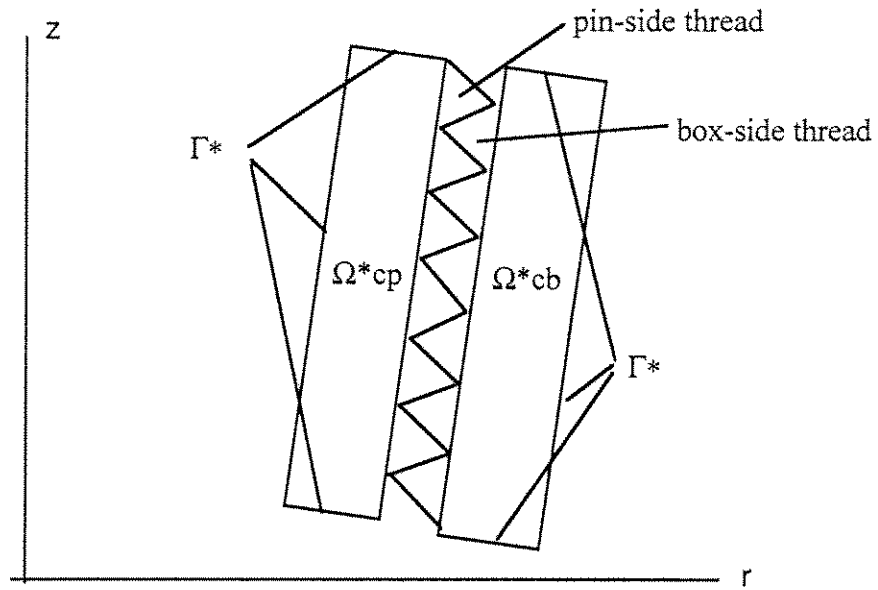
Local Modeling of Tubular Composite Threaded Joint
